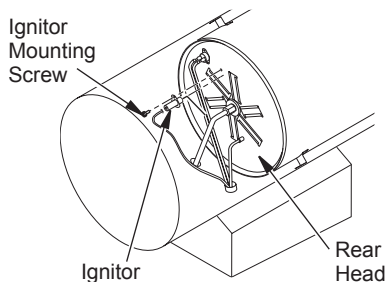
Removing Ignitor Mounting Screw and Ignitor
